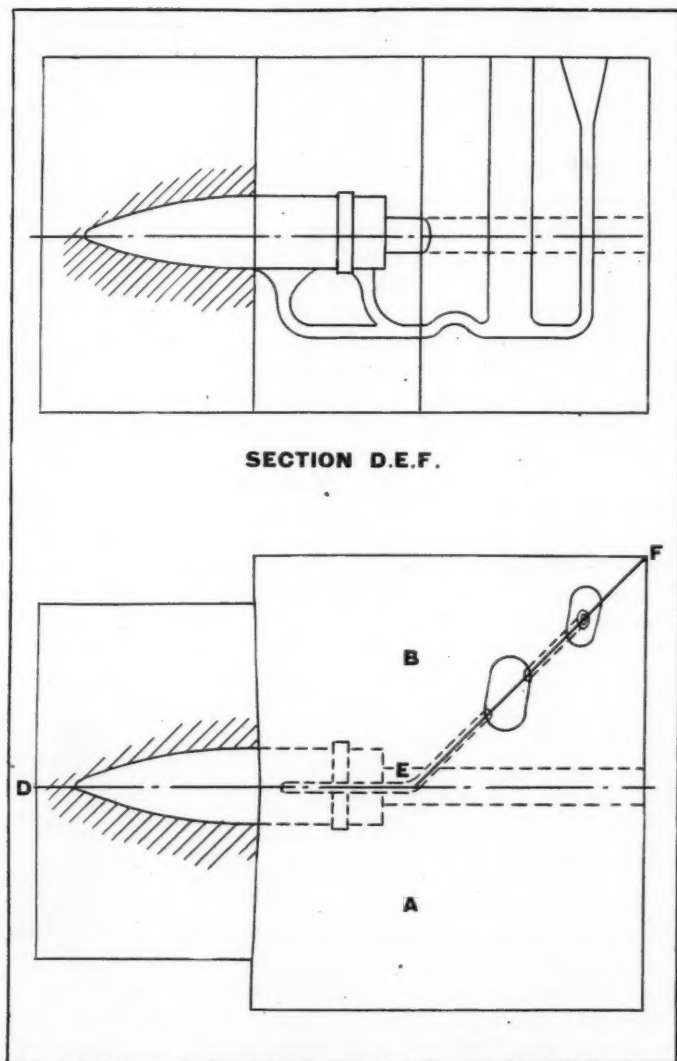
SKETCH OF THREE-PART PERMANENT MOLD FOR A 60-POUND SHELL
